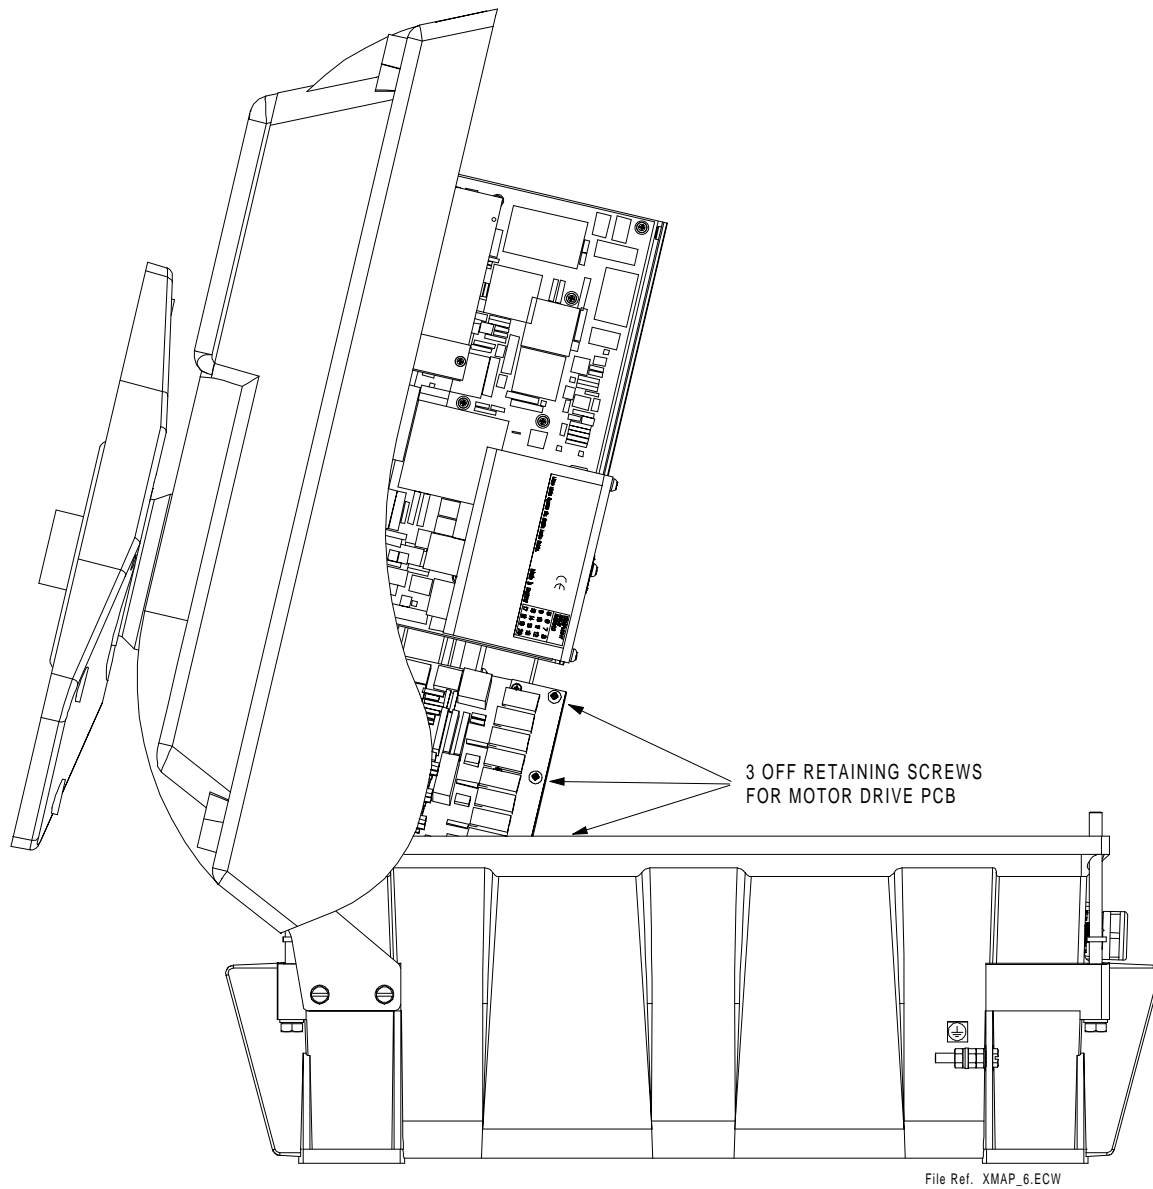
X-Band Masthead Turning Unit - Fitment of Main Assemblies
